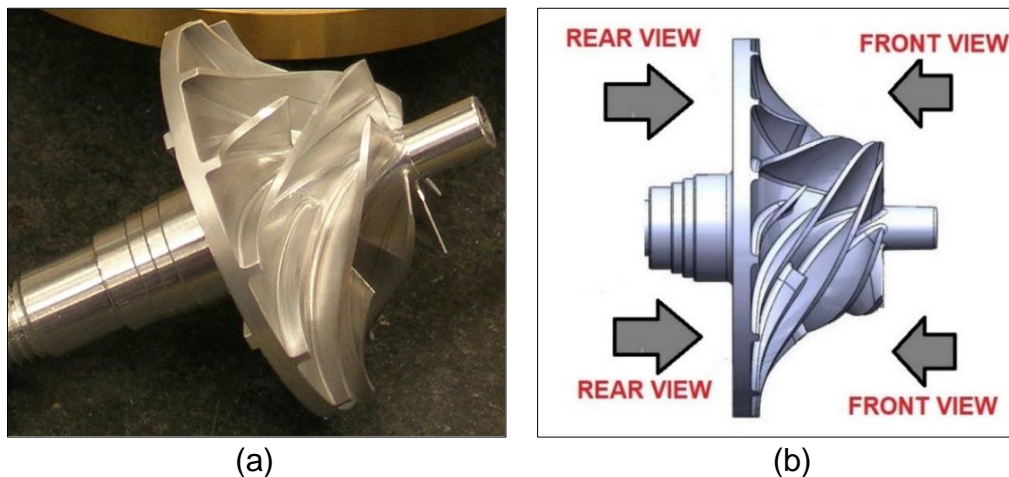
Semi-shrouded impeller as: (a) it appears in real life and (b) a profile drawing showing its front and rear view
